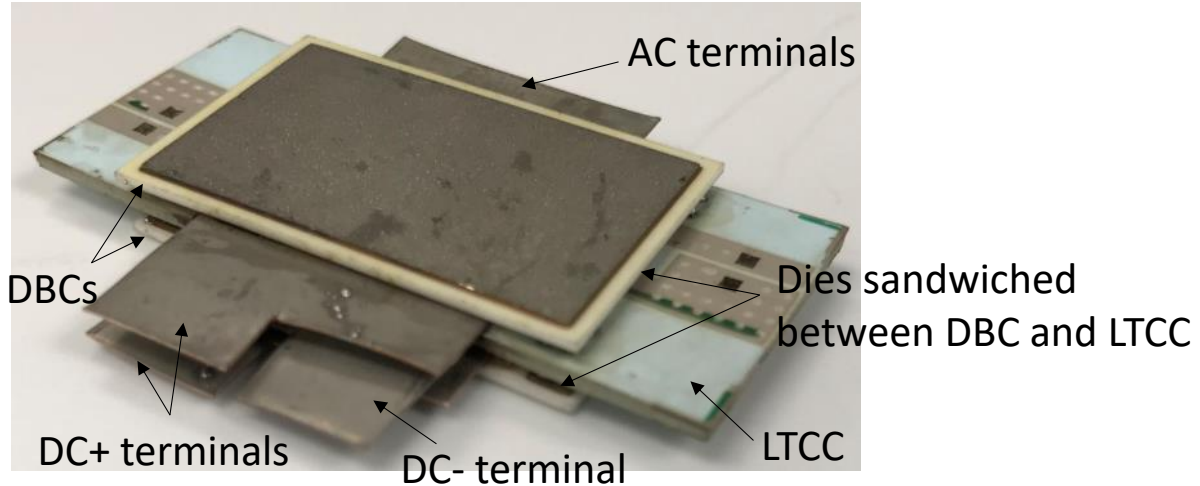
21 A fabricated double-sided stack wire-bondless module prototype.
